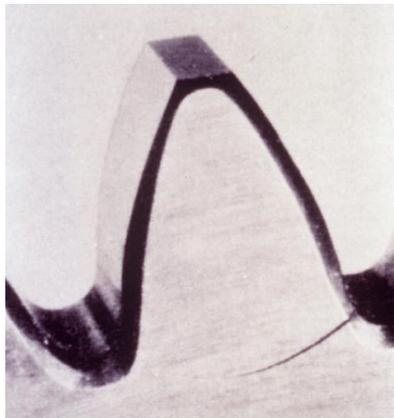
Gear bending fatigue failure initiated in the root fillet radius.
